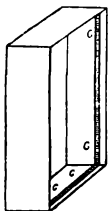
Procure some common twill lining from the draper's and some brown carpet paper. The outside dimensions of the bellows when completed will be 16in. by 13in., and it should be
